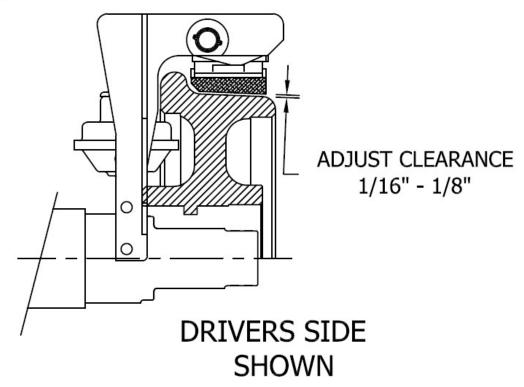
PROPER BRAKE SHOE TO WHEEL CLEARANCE
